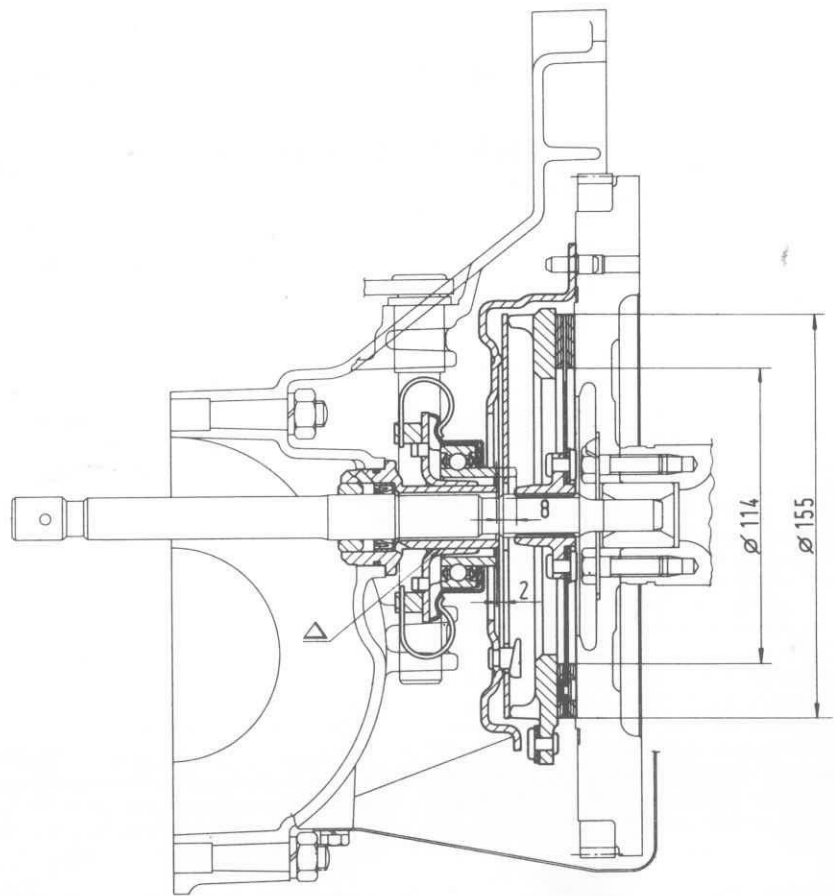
2 A section through the clutch assembly and flywheel. The travel of the release sleeve is shown as 8 mm (.315 inch) and the clearance to be maintained by adjusting the release cable is 2 mm (.079 inch). The small triangle indicates the point to apply grease
